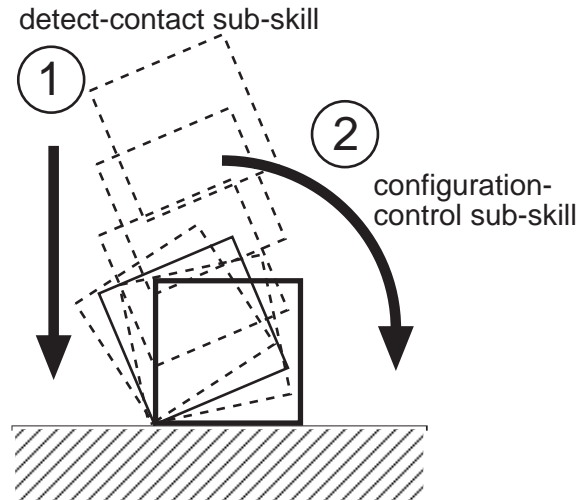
Implementing a make-contact assembly skill primitive through force compliance skills
